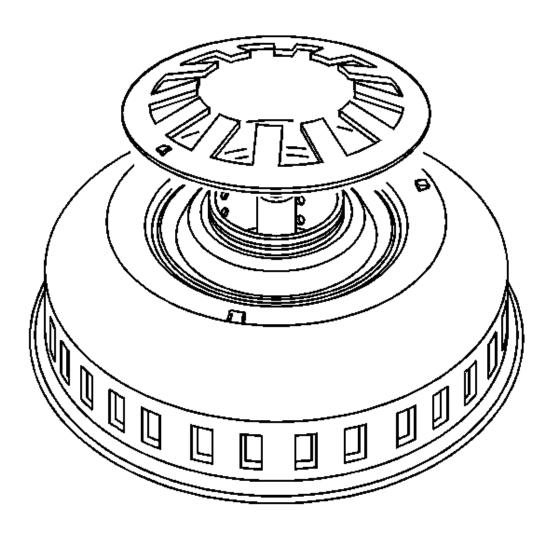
1-2-3-4 Clutch Piston Component View Courtesy of GENERAL MOTORS CORP.
